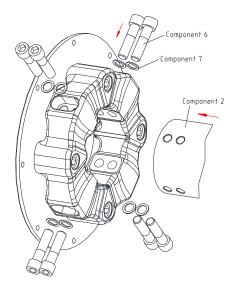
Assembly of the elastomer parts to the intermediate shaft
